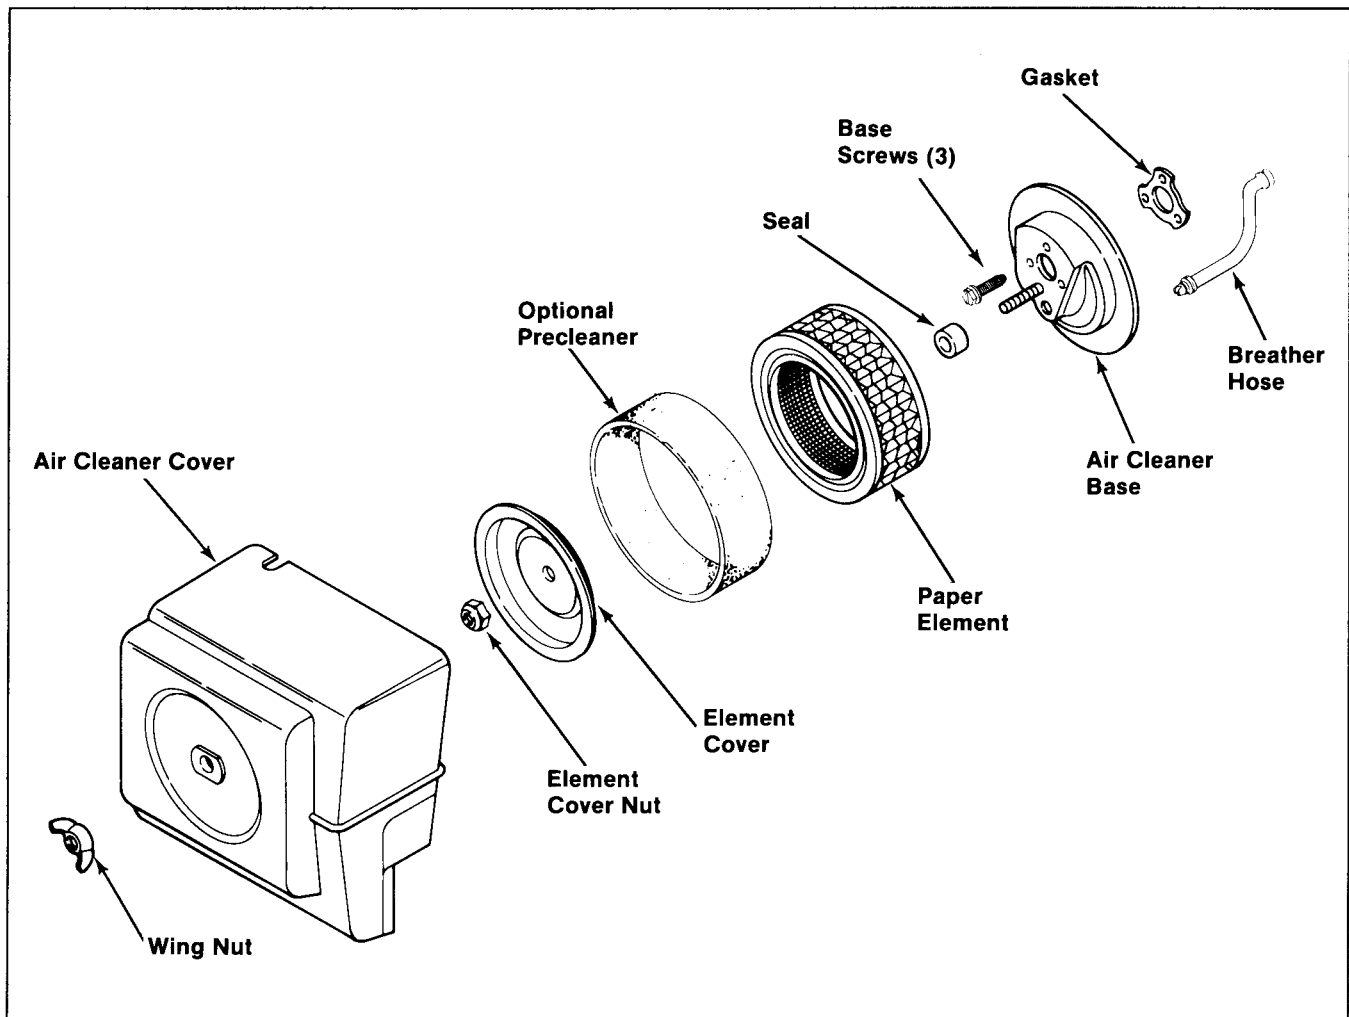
K181 New Look, Air Cleaner Assembly.
